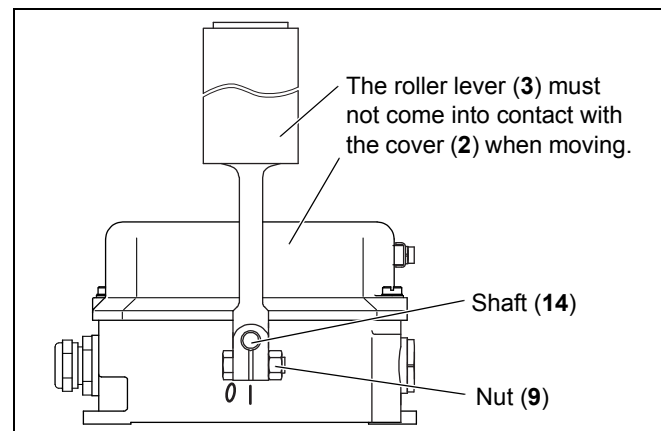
Mounting the roller lever on the belt misalignment switch
